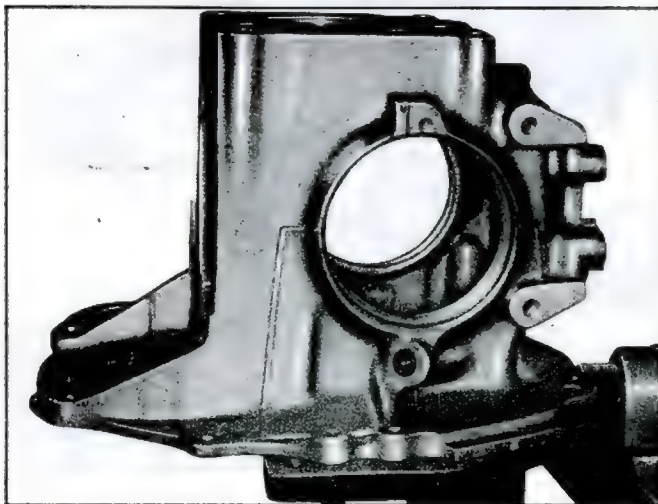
Differential Carrier Installed in J-3289 Holding Fixture
